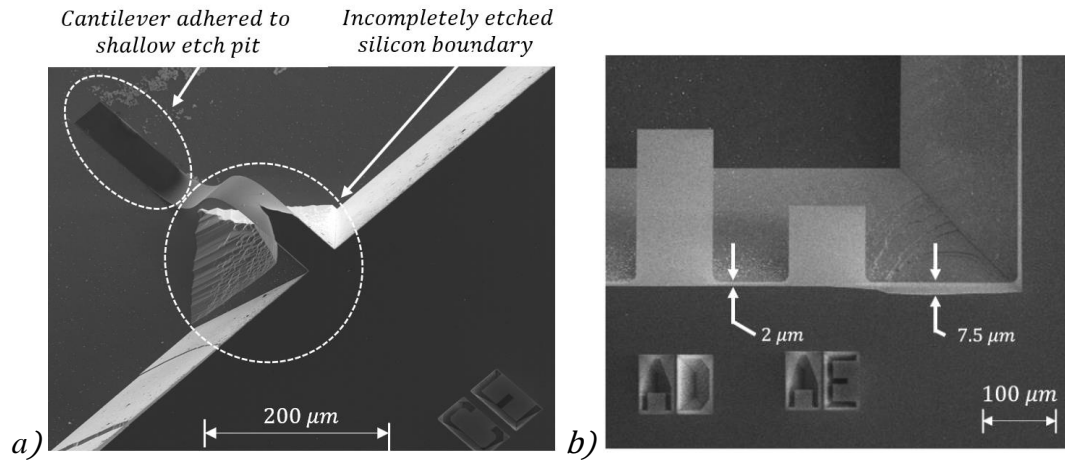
a) Test beam structure experiencing two failure modes simultaneously under-etch failure caused incomplete edge formation and long cantilever stiction to the shallow etch pit (SEM). b) Inconsistent cantilever boundary revealing a shifted silicon plane during release, due to possible deposition and/or masking contamination.
